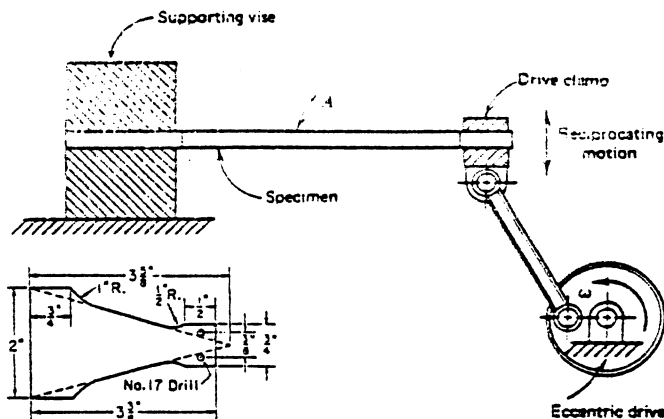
Reciprocating-bending fatigue-testing machine, and typical specimen (at lower left) for testing of sheet
